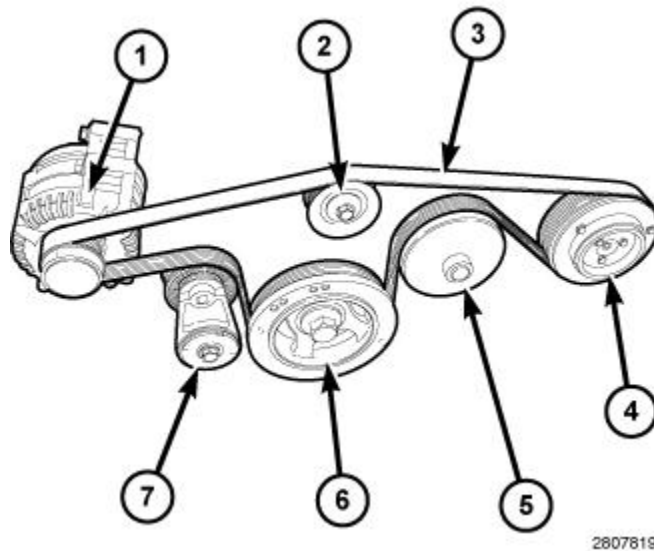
Idler Pulley, Tensioner Arm, Belt, Idler, Tensioner & Belt Routing
